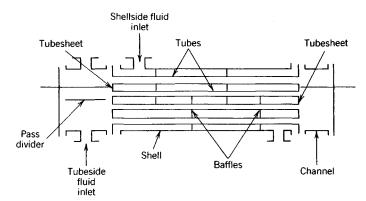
Schematic illustration of shell and tube heat exchanger construction.
